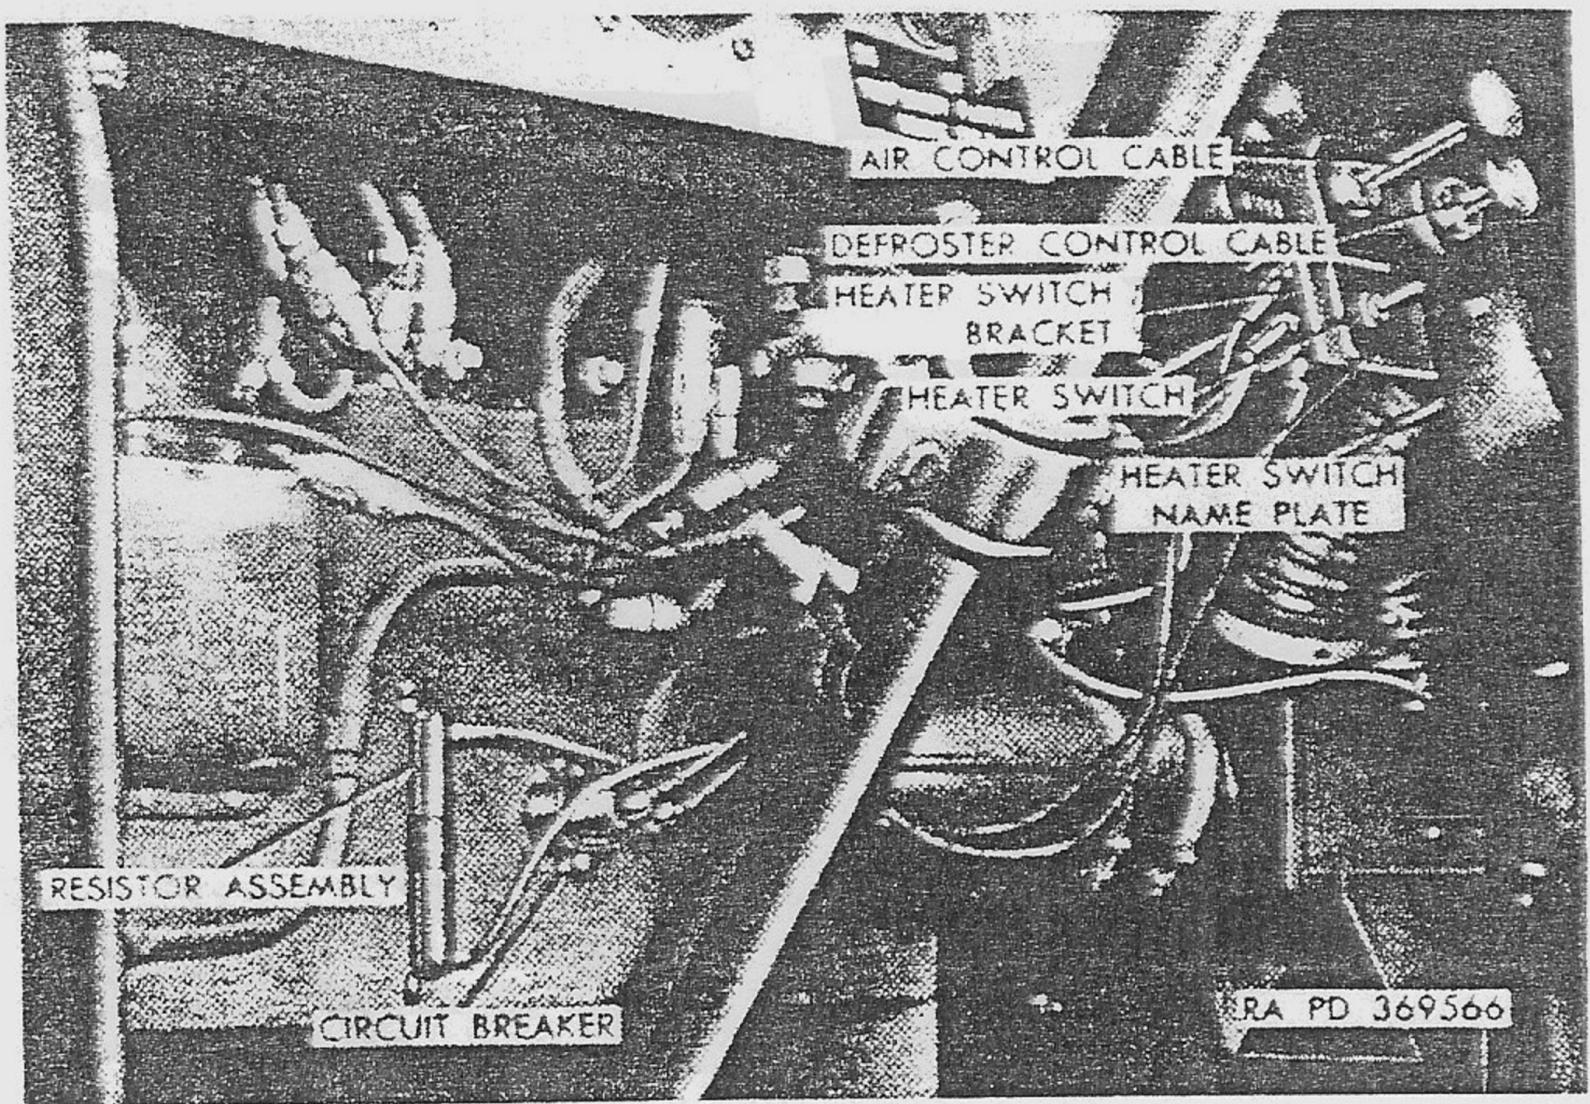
Installation of heater control cables, switch, resistor, and circuit breaker.
